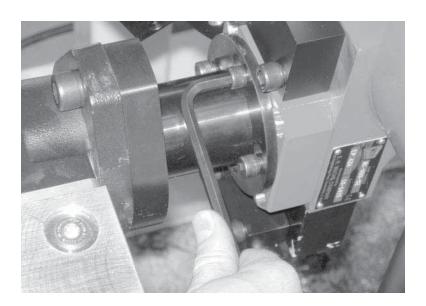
Turn the flange to seat the screws in the slots, then tighten the screws.
